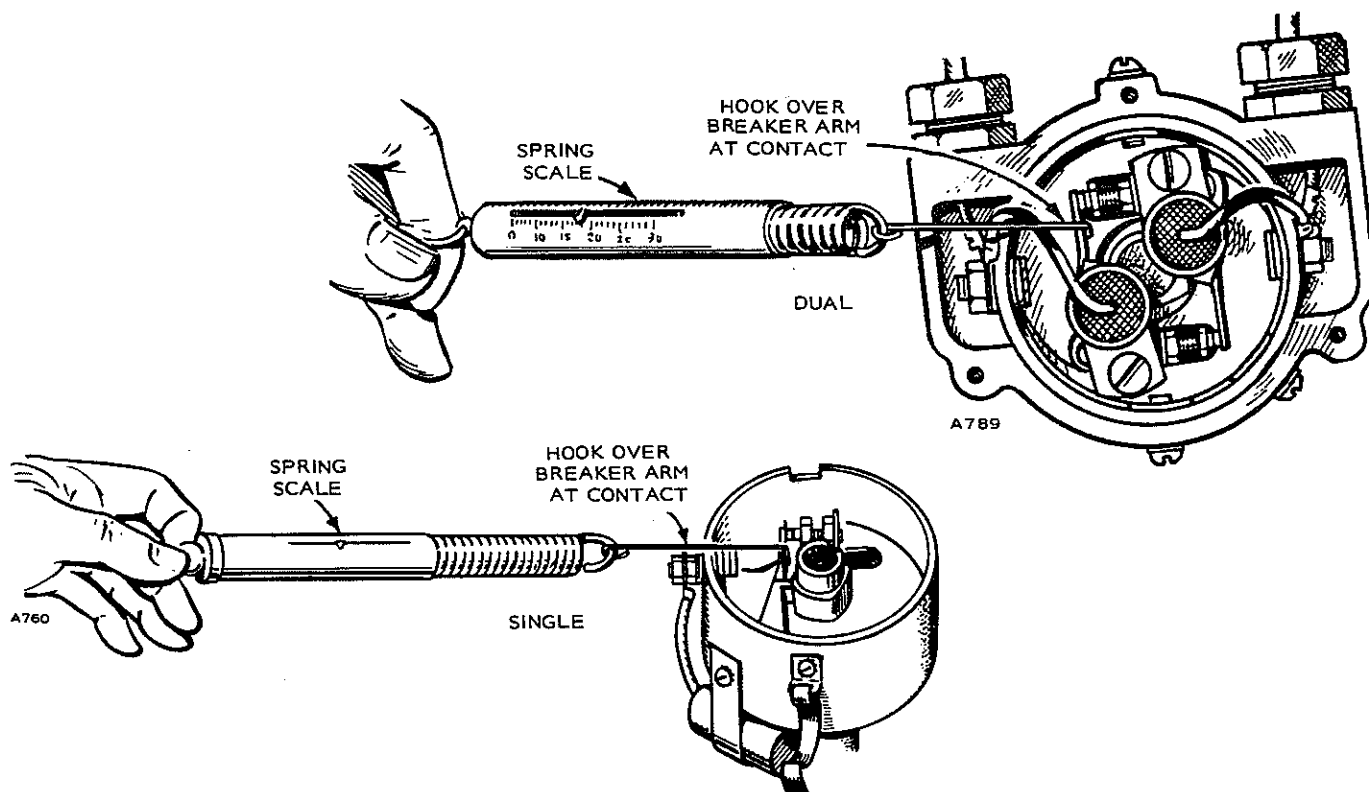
CHECKING BREAKER POINT SPRING TENSION
